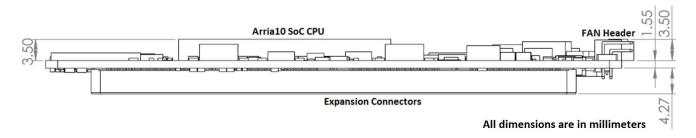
Mechanical dimension of Arria10 SoC/FPGA SOM- Side View
